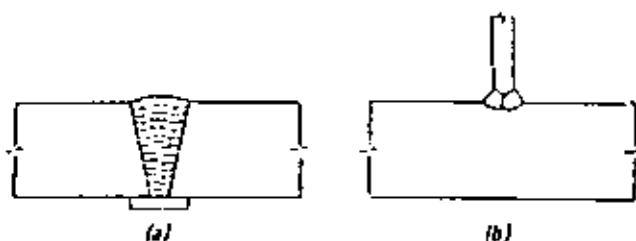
A groove-welded butt joint in thick plate (a) requires a higher preheat, because of joint restraint, than a fillet-welded joint of a thin member and a thick plate (b). See Section 2-3 for the minimum size weld required by AWS.
